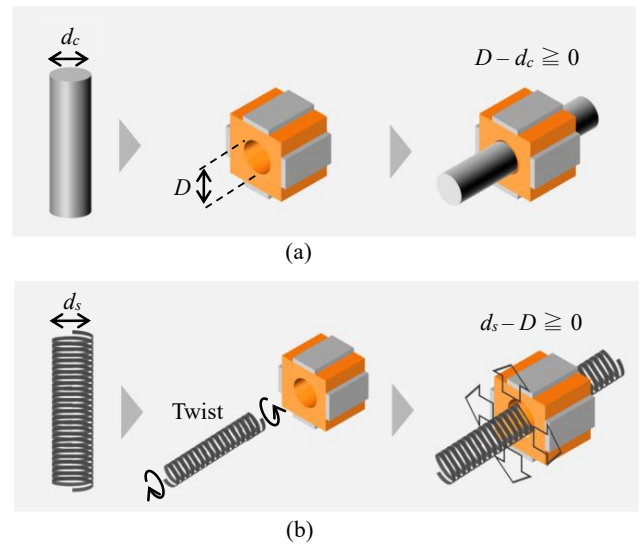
Preload methods using (a) cylinder shaft and (b) spring shaft.
